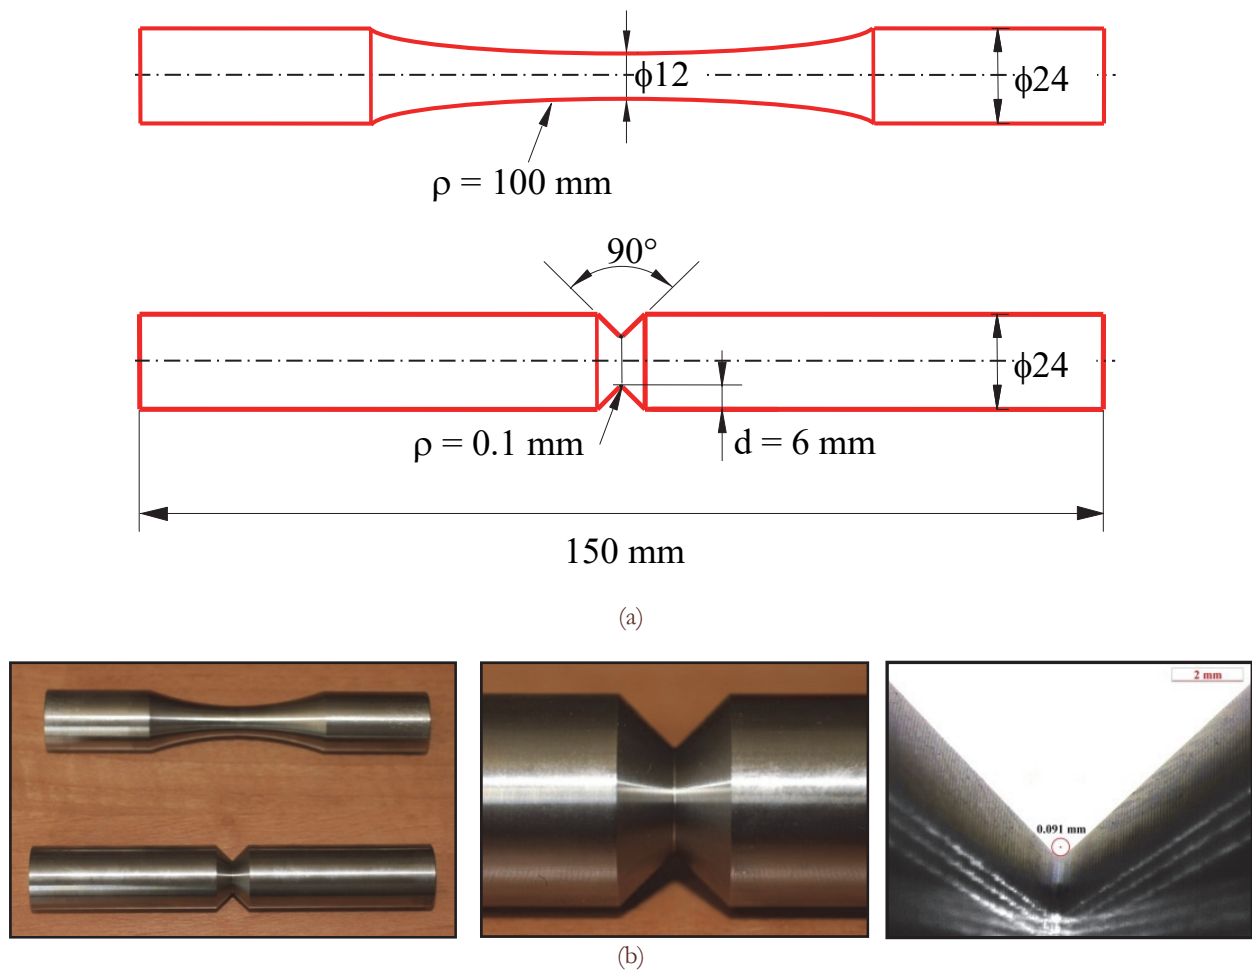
(a) Geometries of smooth and sharply notched specimens and (b) examples of tested specimens.
